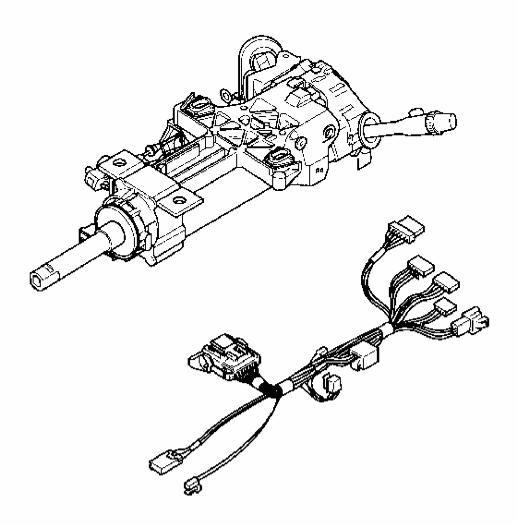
View Of Steering Column And Wire Harness Assembly Courtesy of GENERAL MOTORS CORP.
